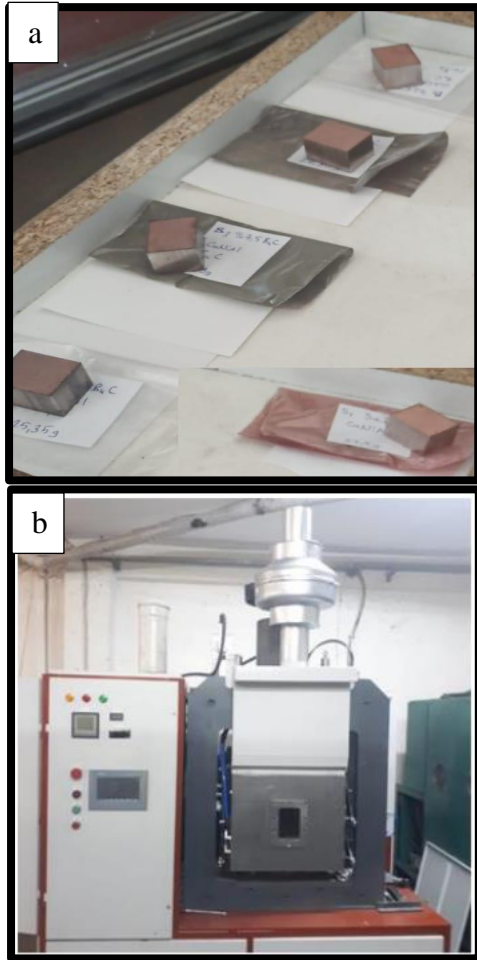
Produced Samples and Figure 1b. Hot Press Machine.
